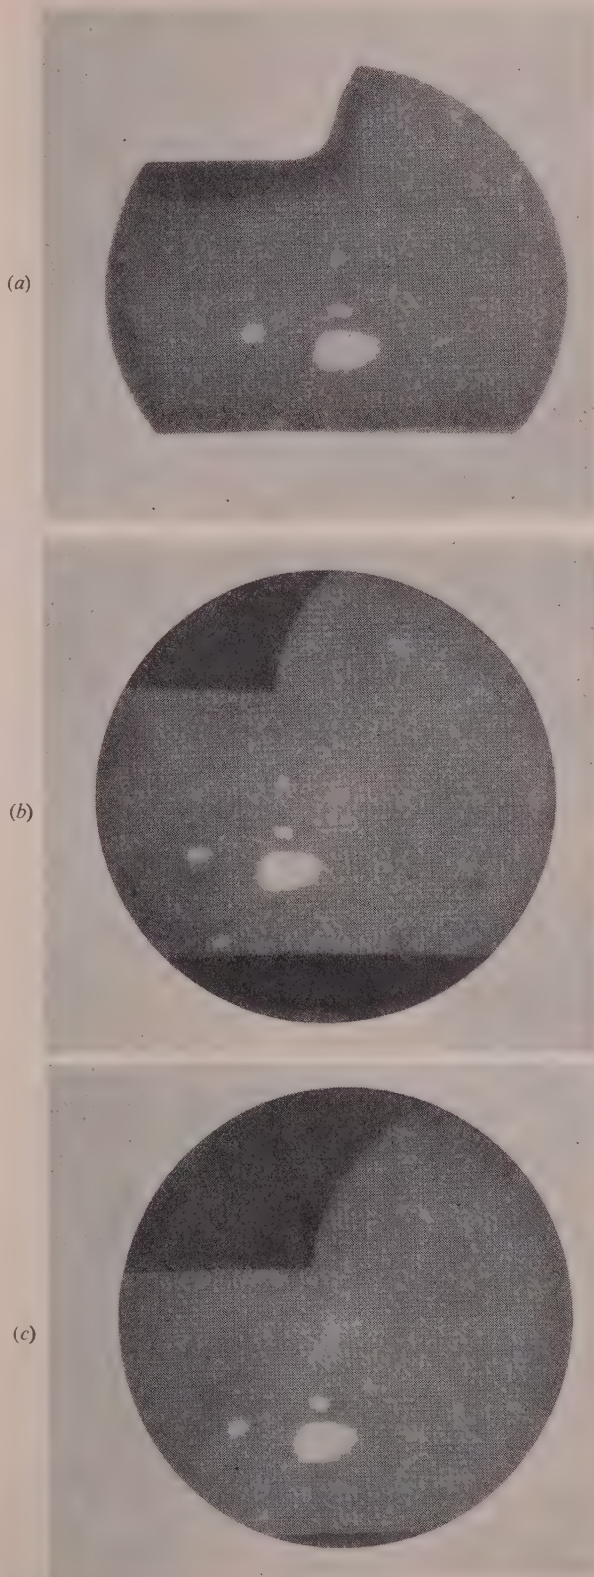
Radiographs of cast-aluminium plate 0.72 in thick containing cavities.
